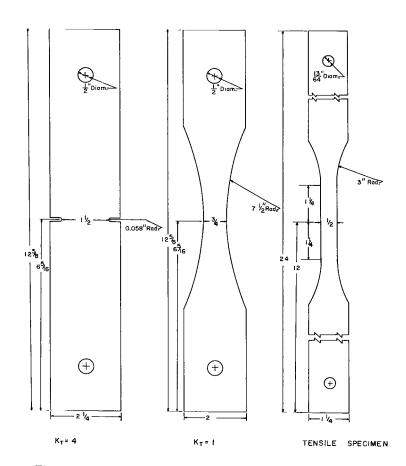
Sheet specimen configuration. All dimensions are in inches unless otherwise noted.
